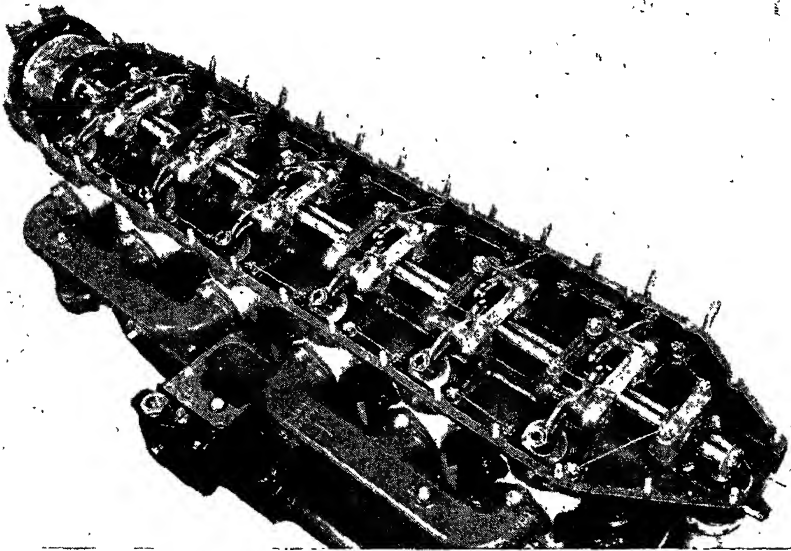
Camshaft and valve mechanism of a six-cylinder in-line engine. (*Ranger Aircraft Engines.*)
